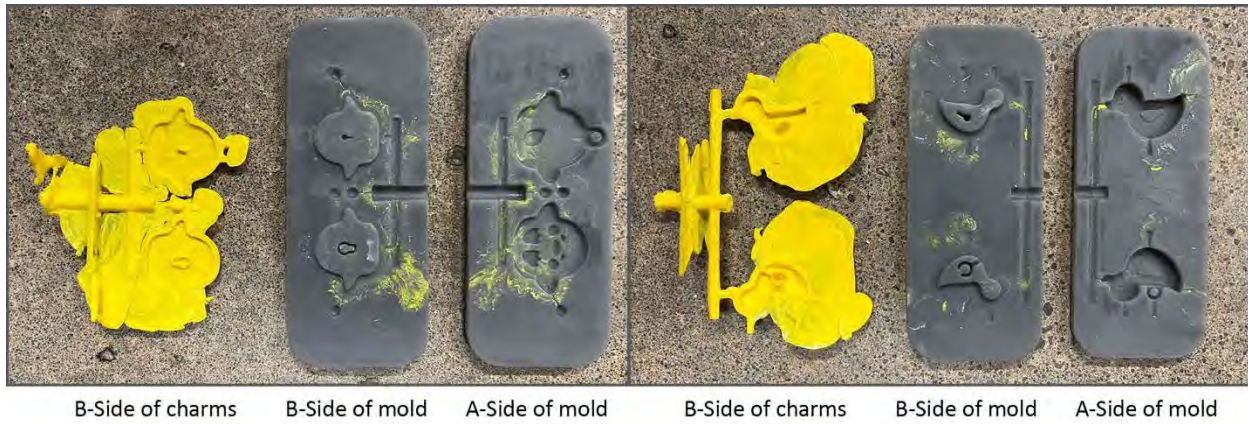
Injection-molded hollow duck charm parts and mold sides. Designs by Karina Amsden, Ayu Nguyen and Gemti Lowenstein.
